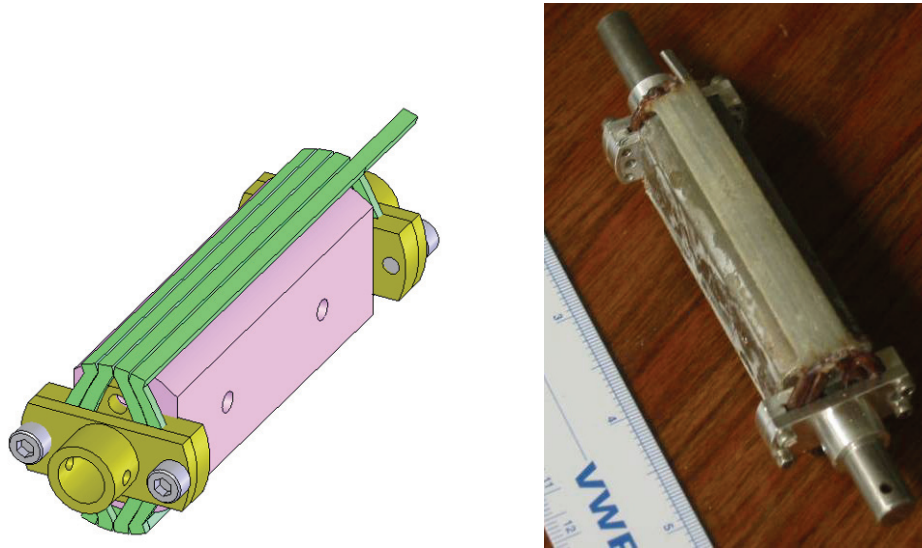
SolidWorks[®] model and picture of the armature with only mold part 2.
